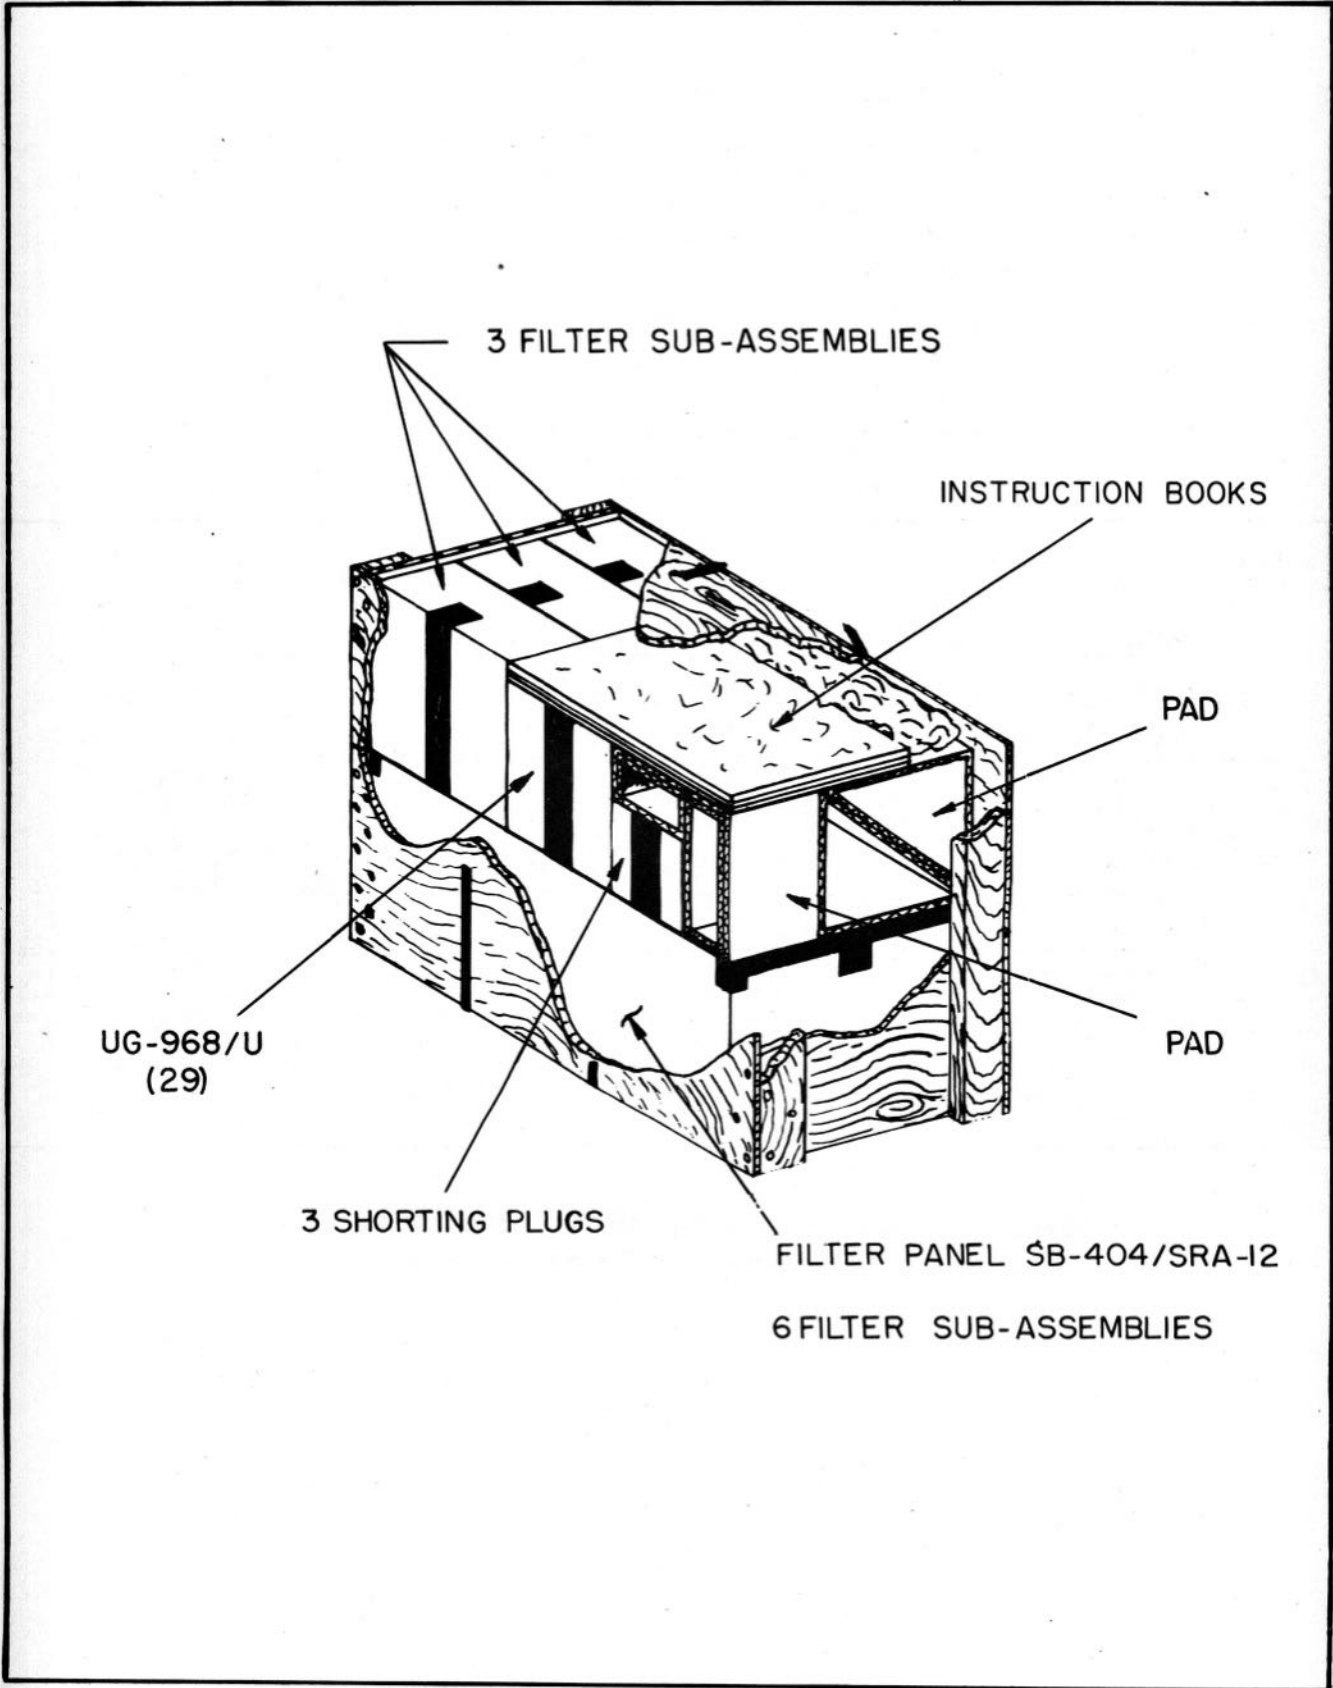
Electrical Filter Assembly AN/SRA-12, Unpacking Procedure
